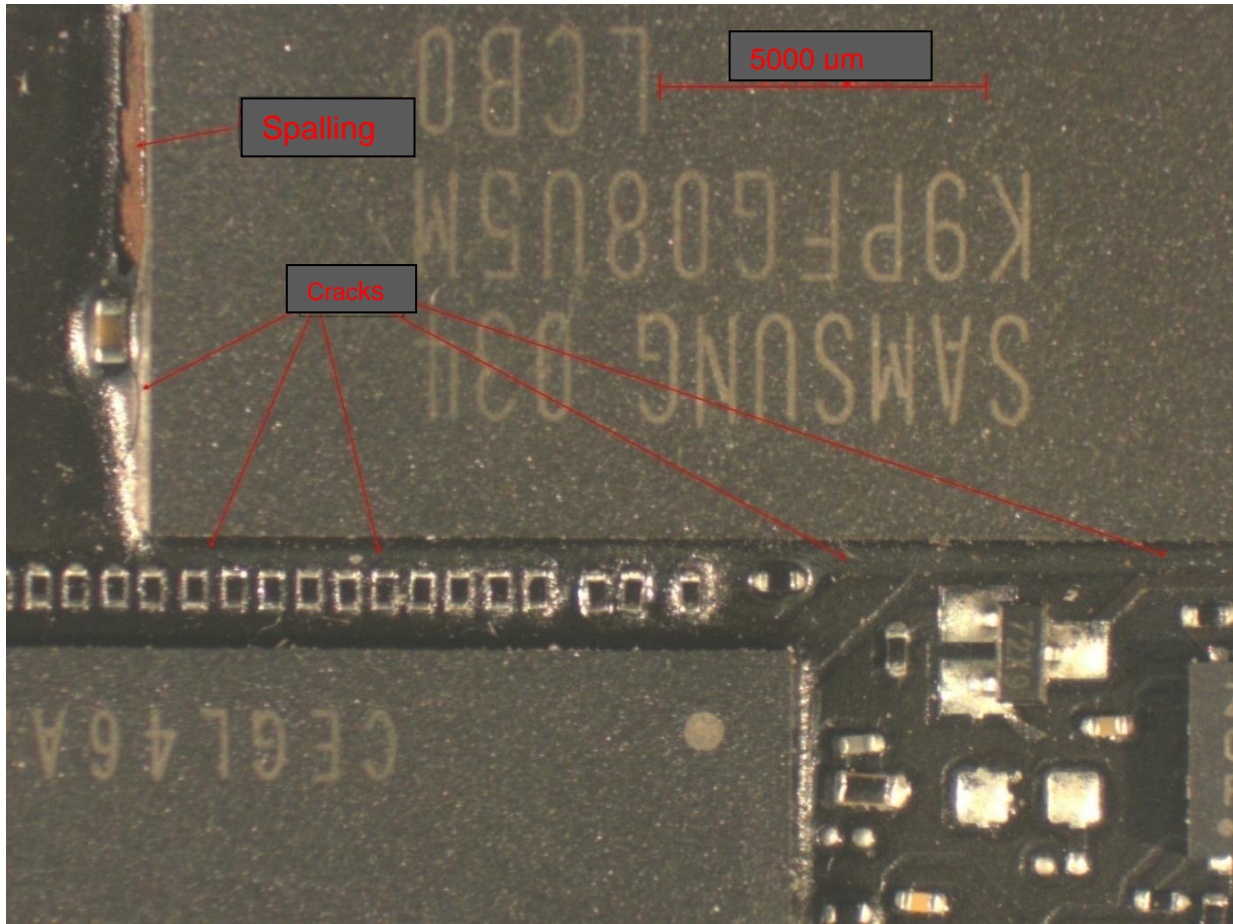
Microscope image of the main printed circuit board (PCB) around the region for one of the FLASH memory devices, showing spalling and cracks in the protective conformal coating applied to the board after parts placement.
